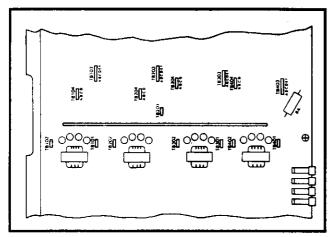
DLSU PCB STRAPPING LOCATIONS
